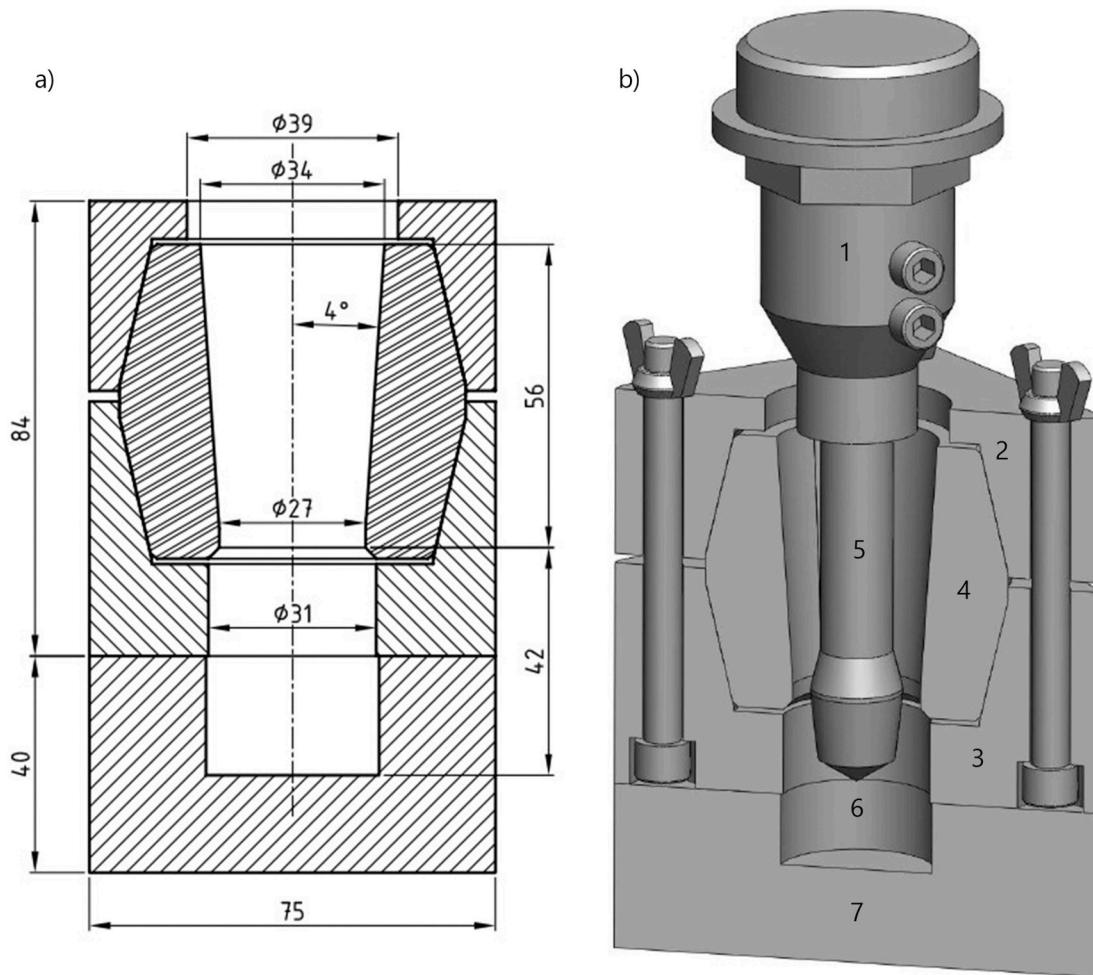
a) Schematic drawing of the die, b) Features of the entire assembled system. 1- sleeve bearing (SAE 1020), 2- upper flange (SAE 1045), 3- lower flange (SAE 1045), 4- split die (H13), 5- punch (H13), 6- relief space, 7- auxiliary support base (SAE 1045).
